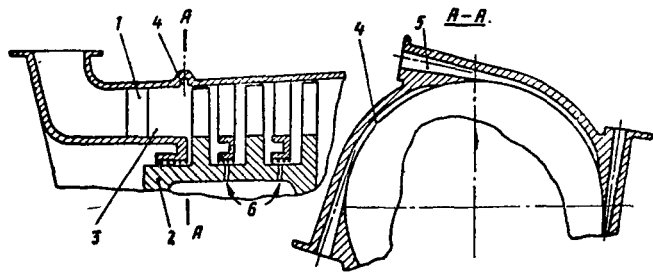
Schematic Drawing of a Multi-Step Turbine with a Separating Space: (1) Nozzle Apparatus of the First Stage; (2) Rotor; (3) Separating Space; (4) Spiral Conveyor for Removing the Separated Phase; (5) Exit Nozzle; (6) Air Conductor to the Seals Between Stages.
